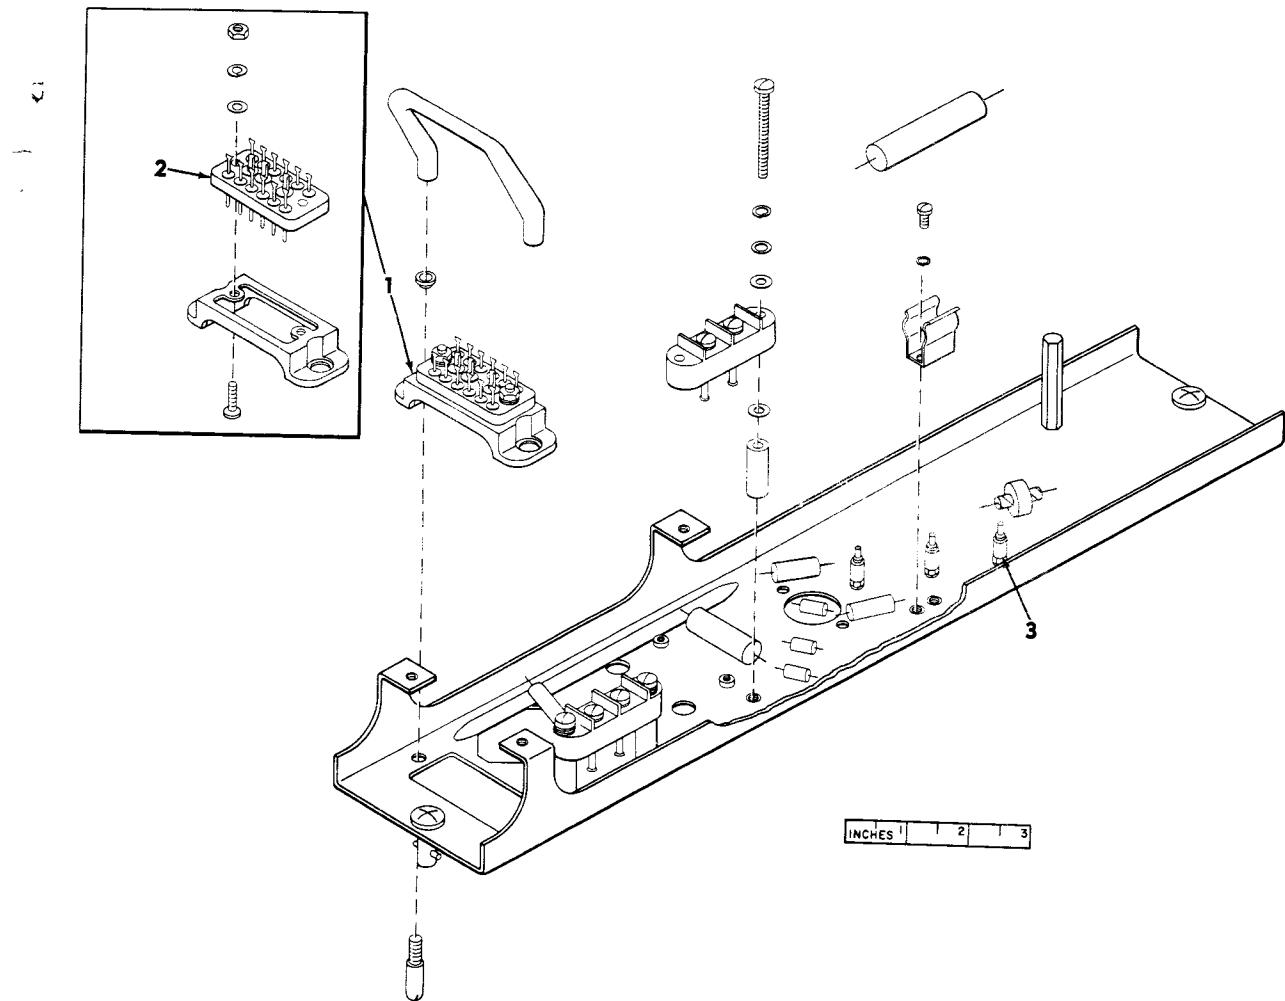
Generator, sweep 0-475/MPA (8172375)—partial exploded view
